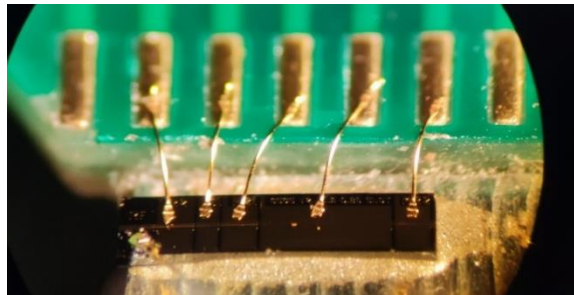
Wire-bonded PIC on subcarrier PCB.
